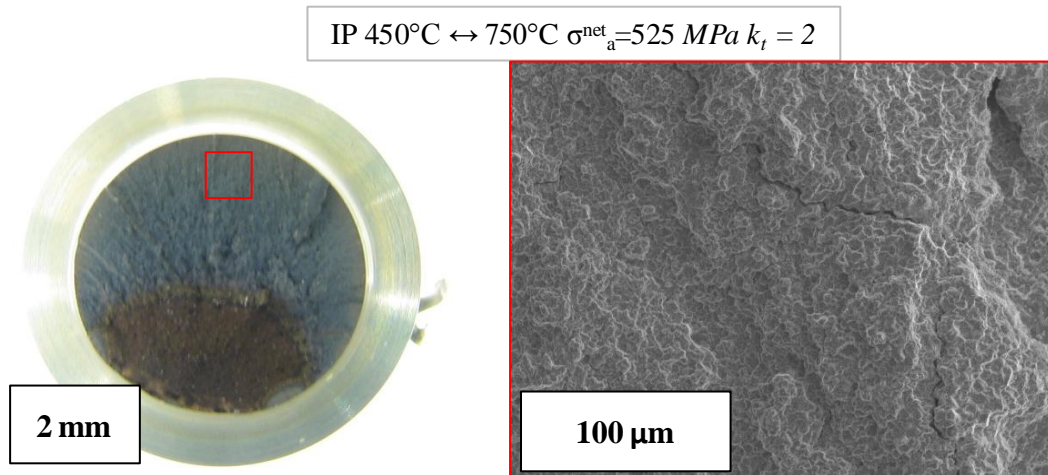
IP TMF fracture surface with evidence of internal intergranular microcracking.
